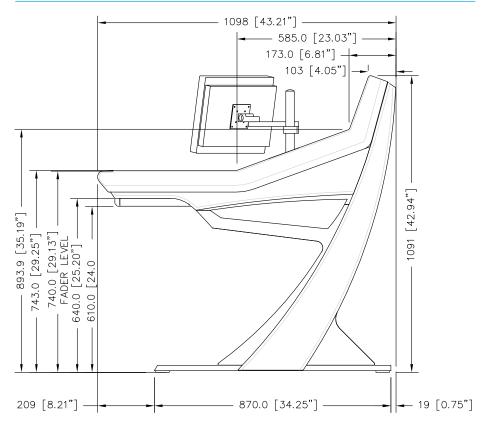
END ELEVATION, STANDARD HEIGHT FLOOR STAND FITTED
